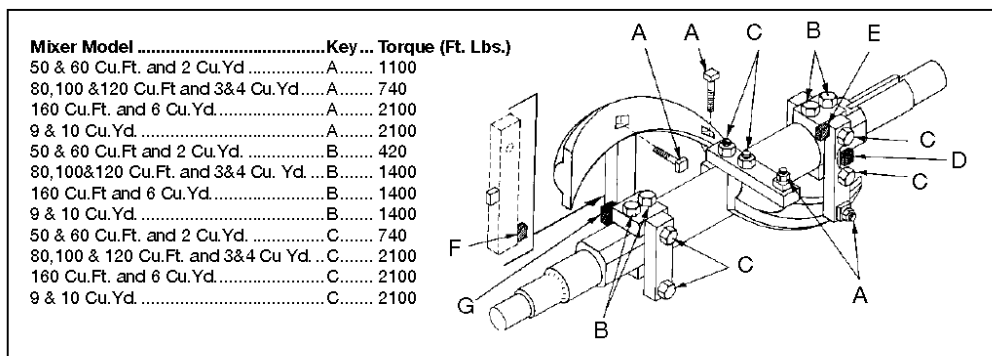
Bolt Torque Requirements, Bolt and Steel Block Locations for Mixer Blade Assemblies
